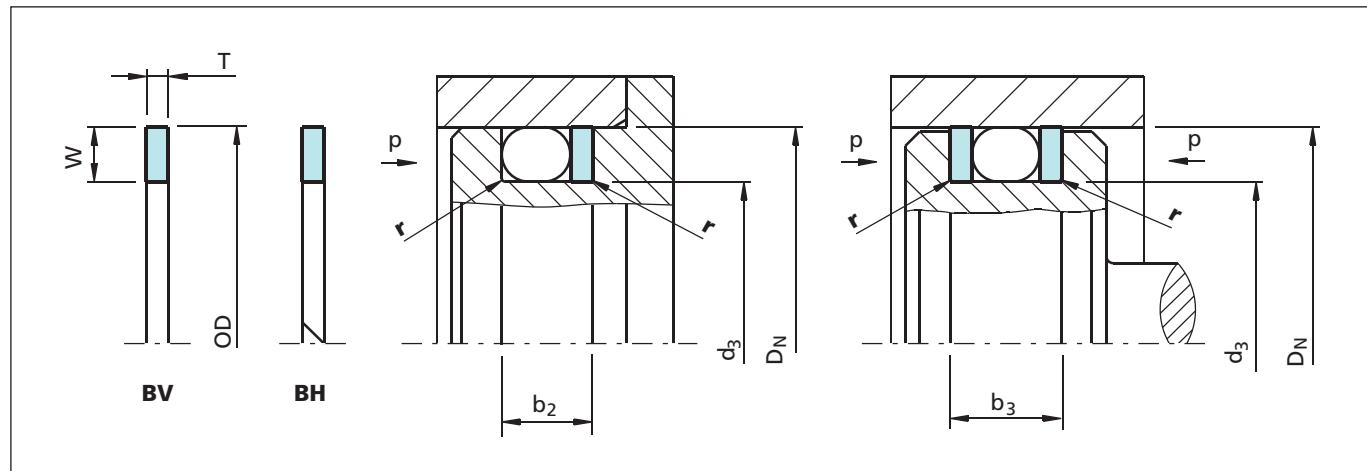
Installation drawing external sealing, rectangular Back-up Ring types
